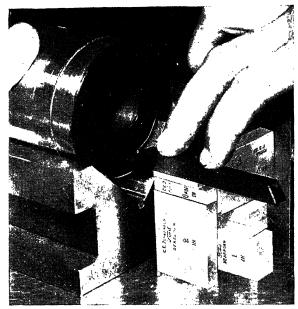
Superaccurate layout. Starting from a surface plate, a number of gage blocks are piled up to the dimension or distance desired. In this case Prussian blue has been placed as a thin coat on the surface, and the sharppointed scribing tool makes a fine line by removing a thin strip of the Prussian blue. A V block is used to support the cylinder, so that, as it is rotated, the center remains the same distance from the surface plate. (Johansson.)
